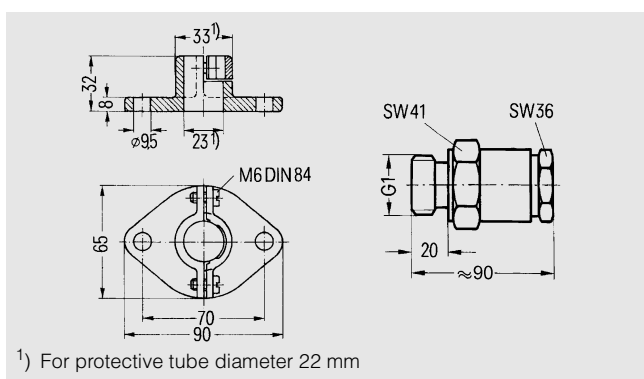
/5 Mounting flange to DIN 43 734 (left) and threaded sleeve (right) for installing straight thermocouples
